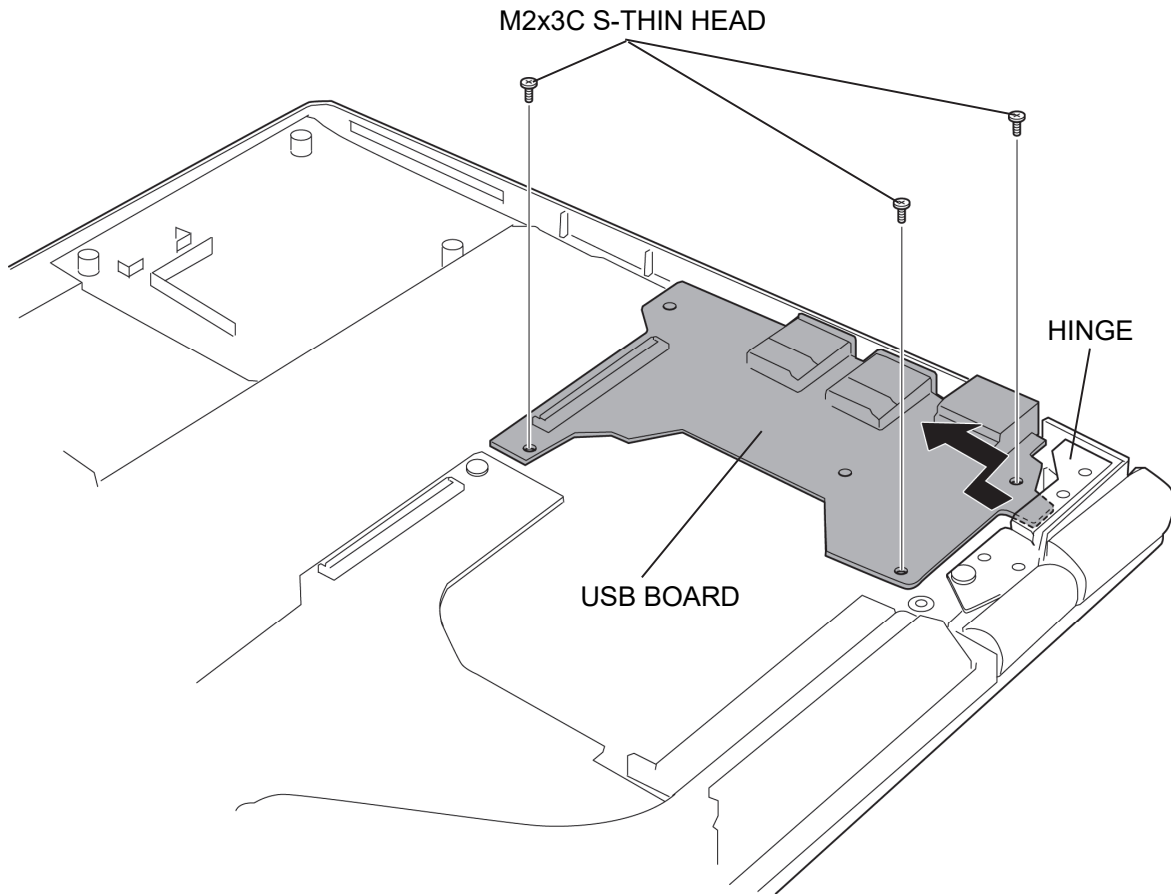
Removing the USB BOARD/LTE BOARD (2)
